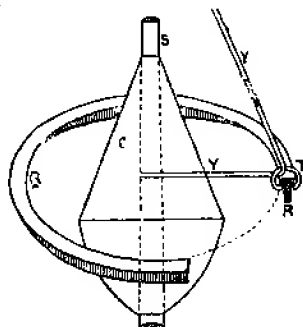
RING AND TRAVELLER TWISTING MECHANISM.
